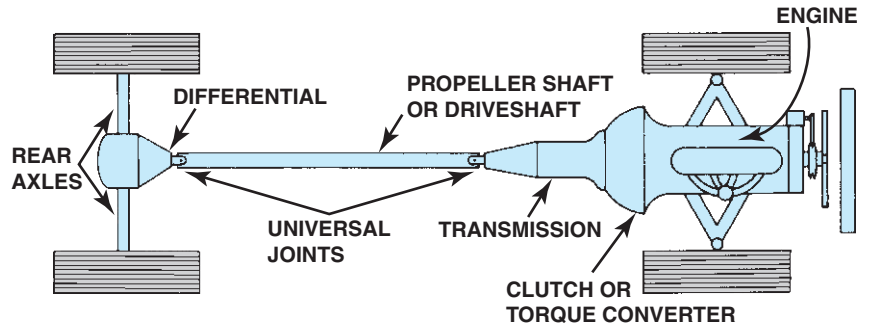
A longitudinally mounted engine drives the rear wheels through a transmission, driveshaft, and differential assembly.
